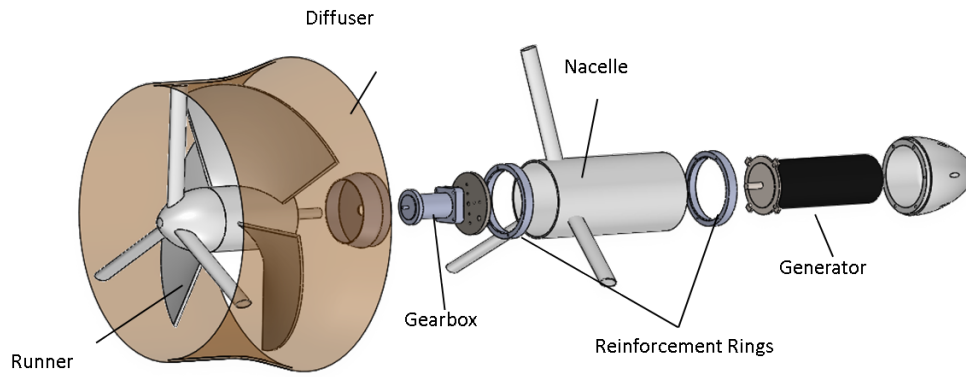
Exploded view of hydrokinetic turbine assembly [3]
